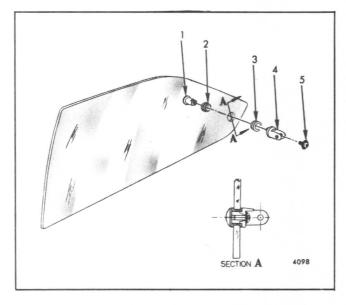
Optional Swing-Out Quarter Window Latch Assembly Support
